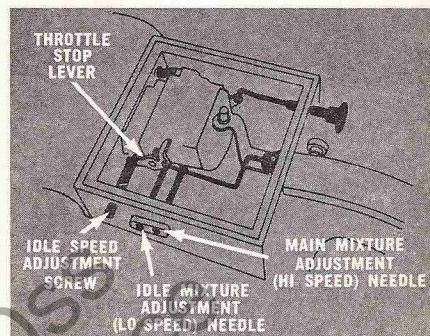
Drawing showing locations of fuel mixture adjustment needles, idle speed needle and throttle stop lever.
